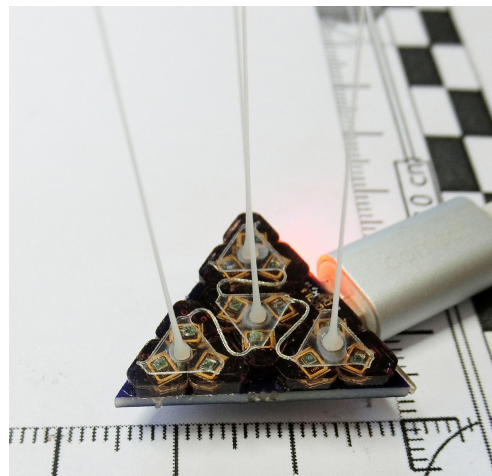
Miniature Embedded Whisker Sensor on PCB.
